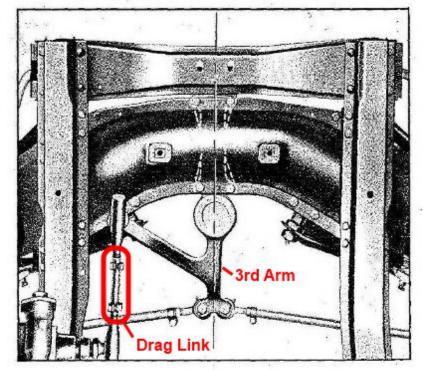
Checking Third Arm Alignment to Determine Drag Link Adjustment
